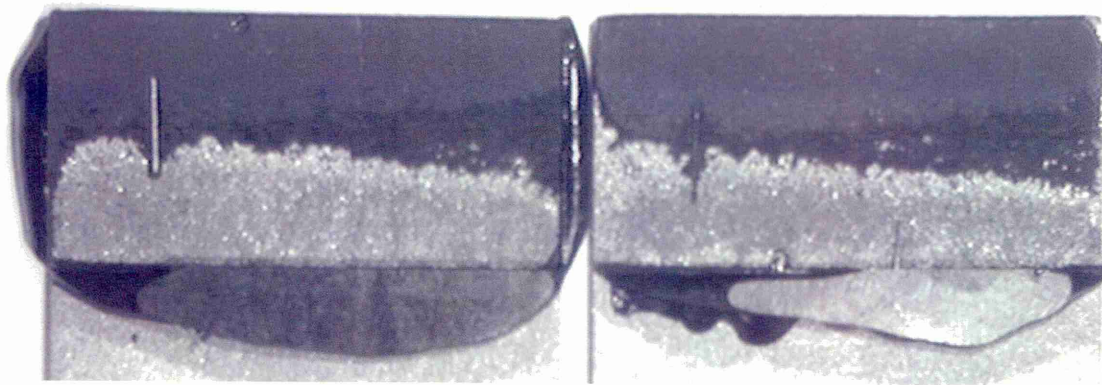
Typical fracture surface observed on failed joints with mechanically roughened adherends
